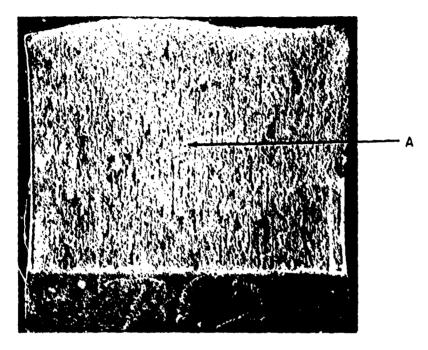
Fracture surface of an A-514 Charpy specimen tested at  $-18^{\circ}$ C, 8x.
